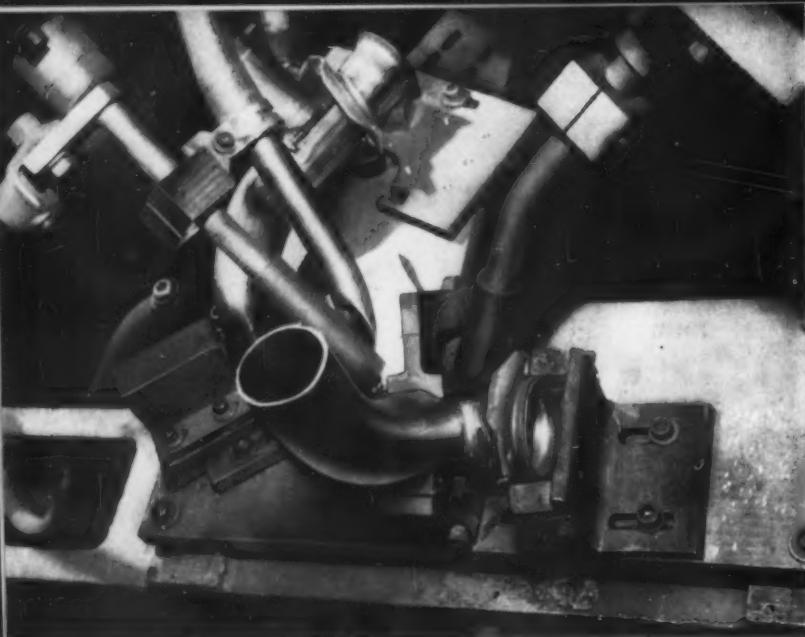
For welding the two radiused edges, the work-fixture rotates on trunnions.
